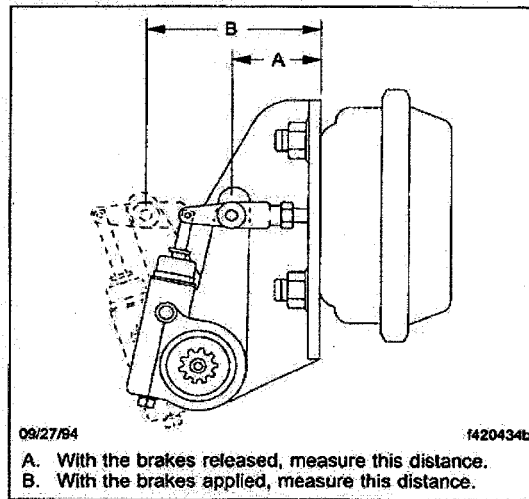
, Brake Stroke Check, Gunite Automatic Slack Adjuster
